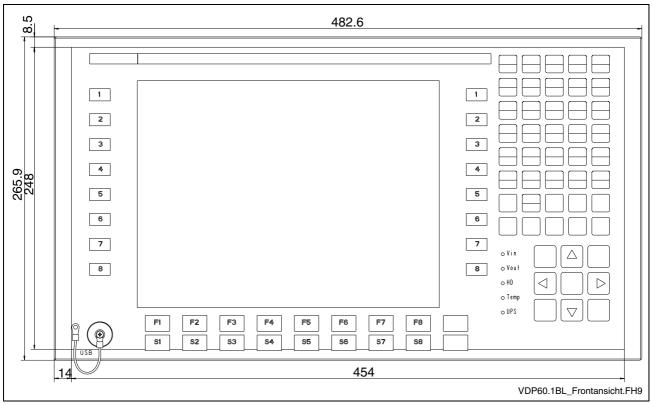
Dimensions – Front panel VDP 60.1BL
